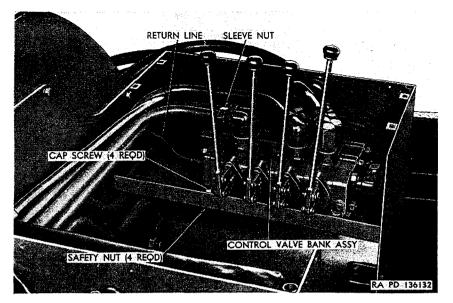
Rear view of operator's compartment and control valve bank assembly with cover removed M62.
